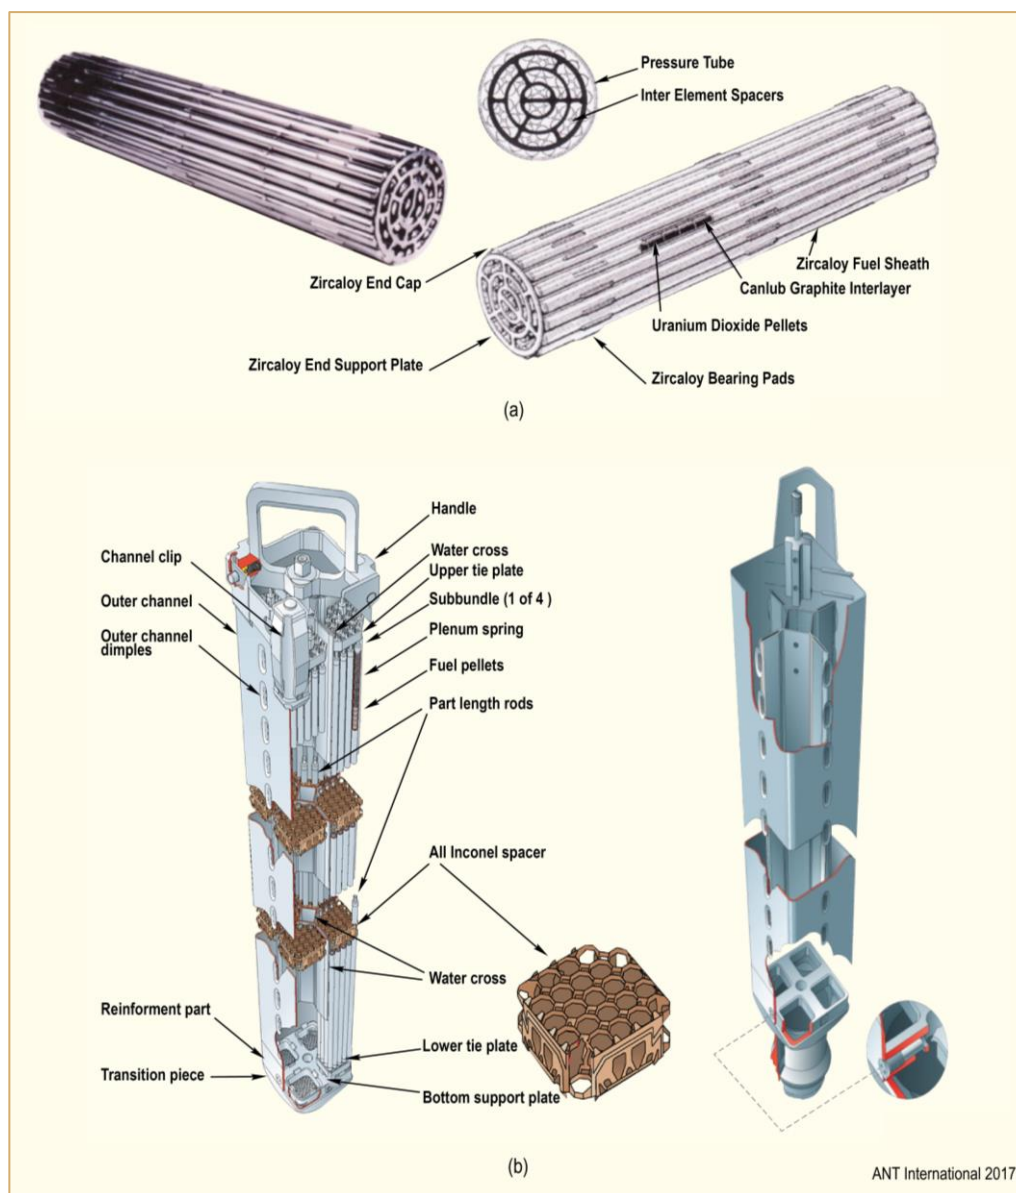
Typical fuel assemblies (a) CANDU; (b) BWR.
